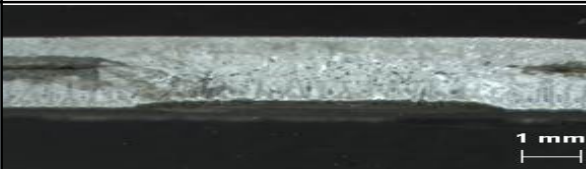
Indentation depth of spot welding with electrode tip diameter (1.2t × 1.6t)
